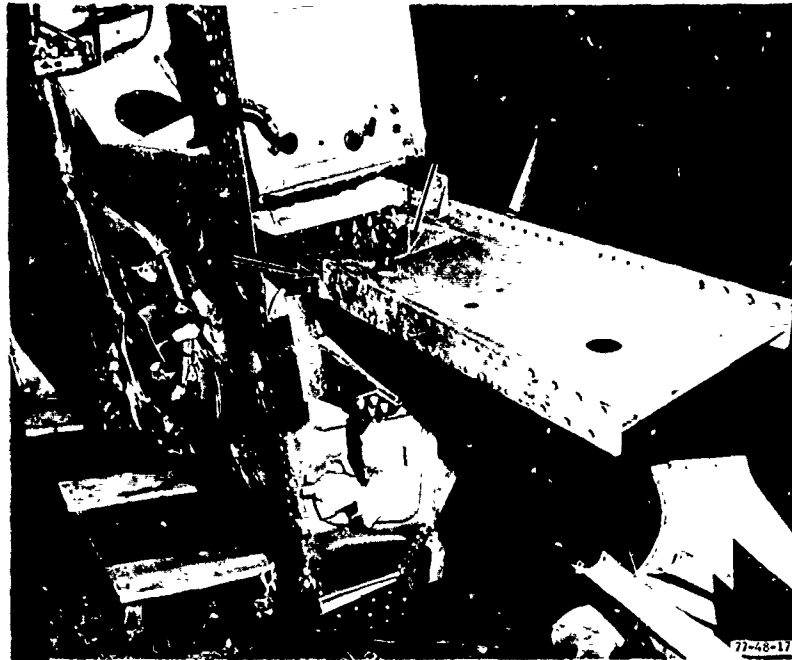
FAILURE OF MAIN SPAR, LEFT WING, TEST 1
